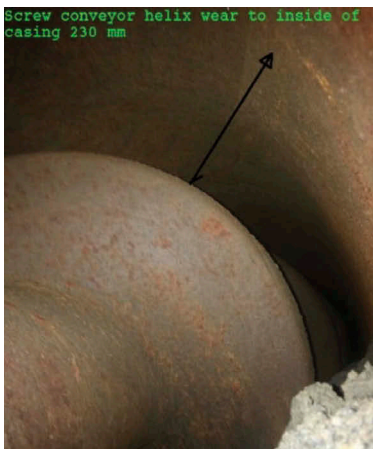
Extreme wear of helix measured at 230 mm to inside of casing & cracks at screw helix shaft.
